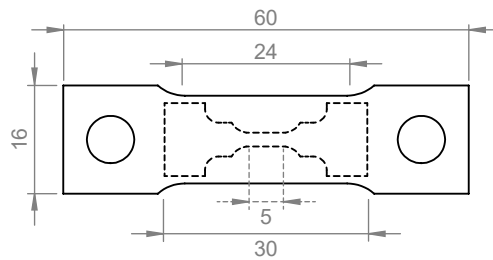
Fatigue specimen geometry for high-temperature fatigue aging (in mm)
